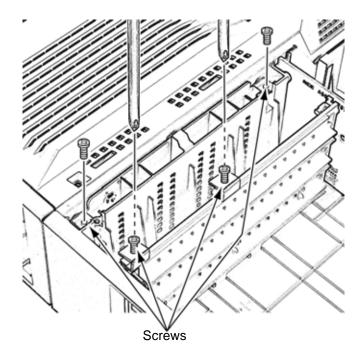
Securing the Expansion Chassis to the Expansion Bracket
